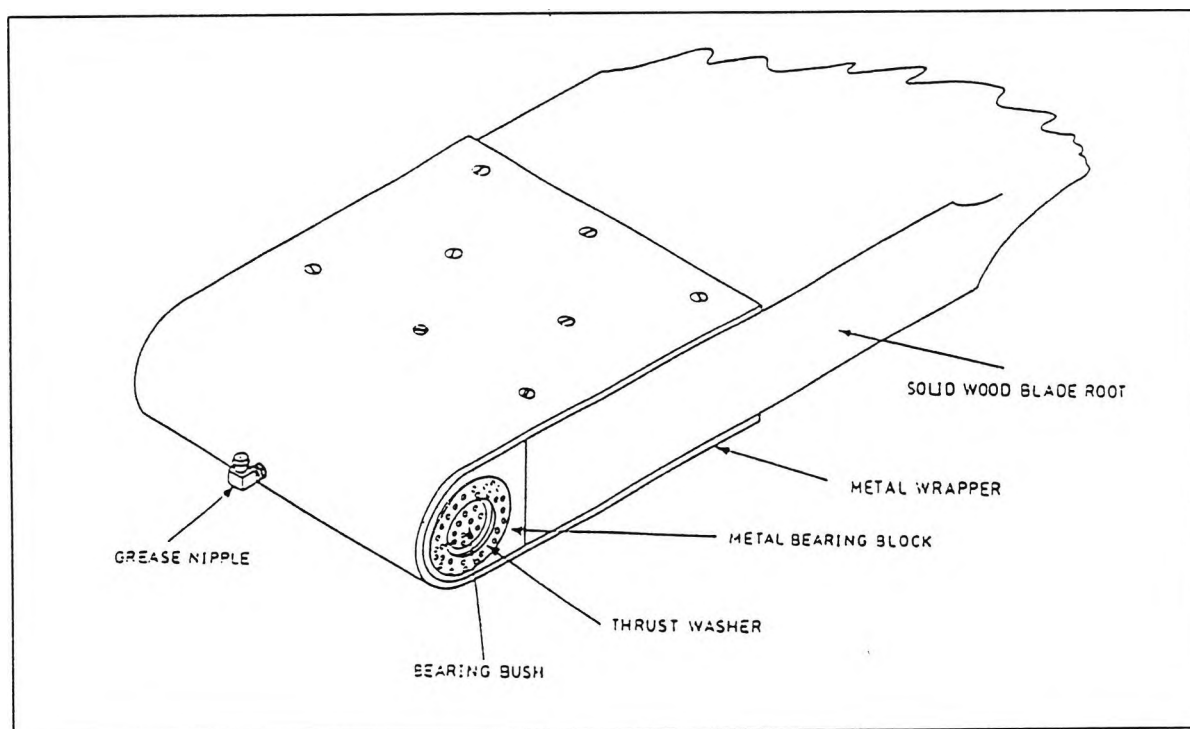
Construction of the blade root, showing the metal outer wrapper and the hinge bearing and thrust bearing bushes.
